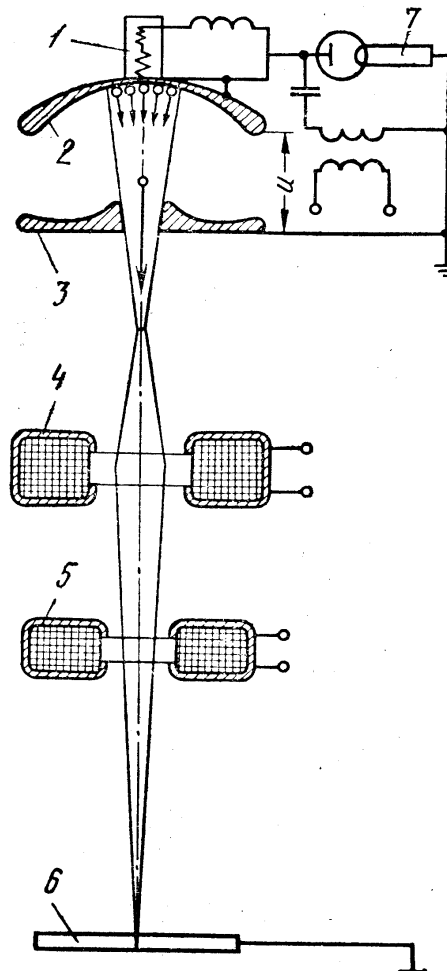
Schematic diagram of an electron beam welding installation
